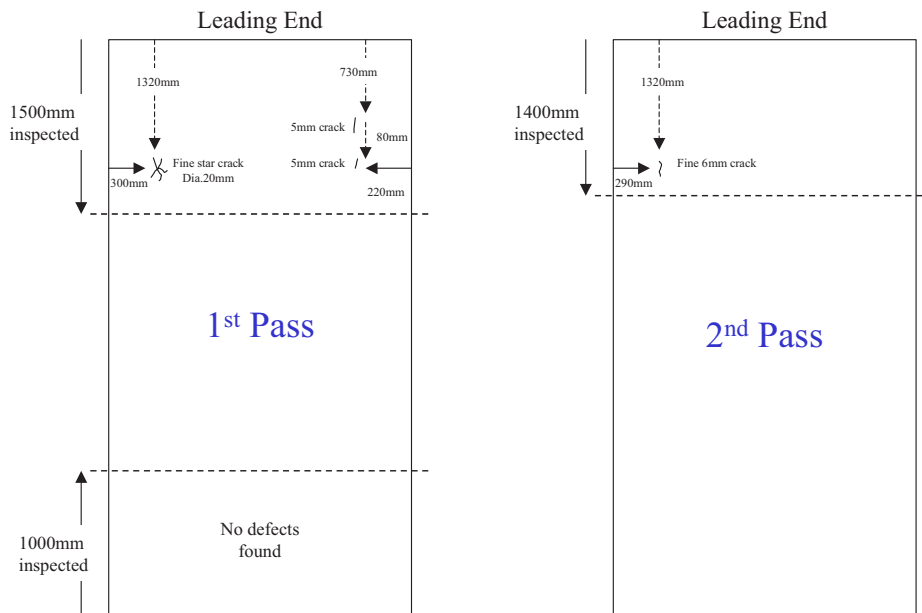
Magnetic particle inspection for cast 79556
